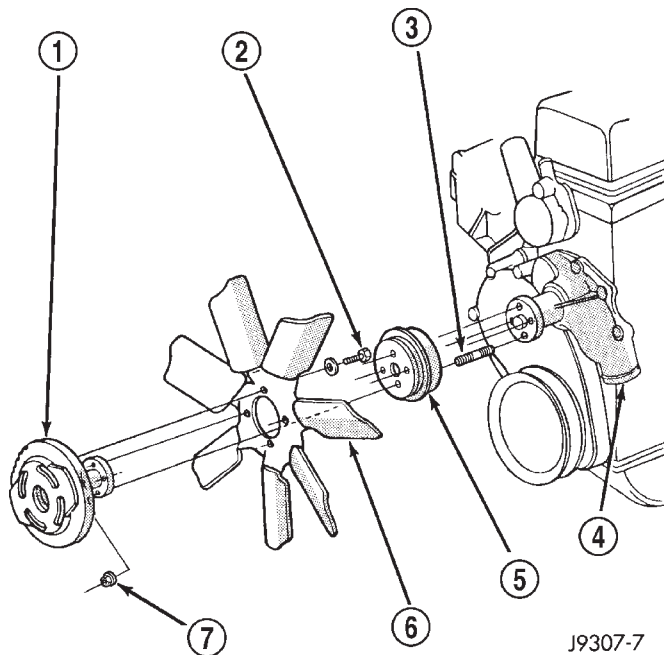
Water Pump Mounted Fan Drive - 2.5L Engine
